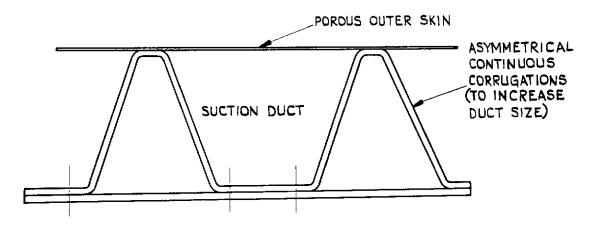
INVERTED ASYMMETRICAL CORRUGATION - SHEET CONSTRUCTION.
